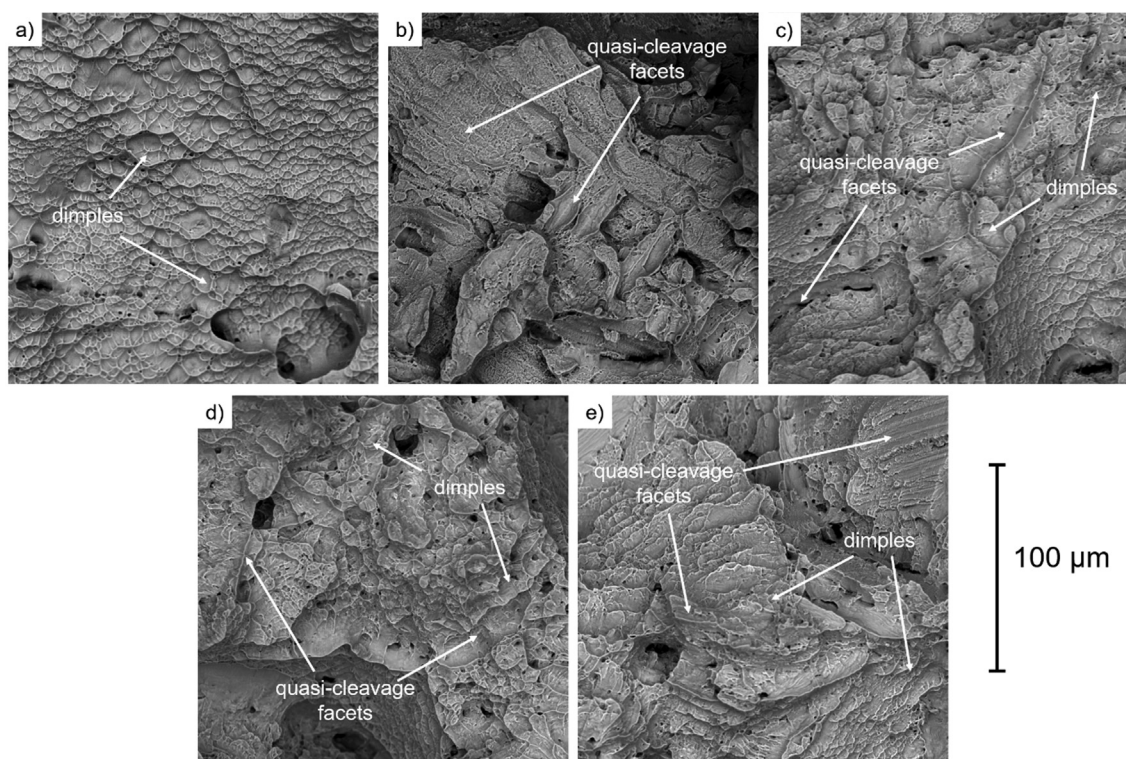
Fracture surfaces of the tensile samples in the as-built (a), HT600 (b), HT750 (c), HT 875 (d) and HT950 (e) states.
